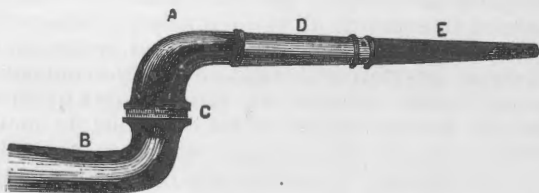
Goose-neck. A B, elbow; C, joint; D, piece of hose; E, discharge-pipe. (See p. 416.)
